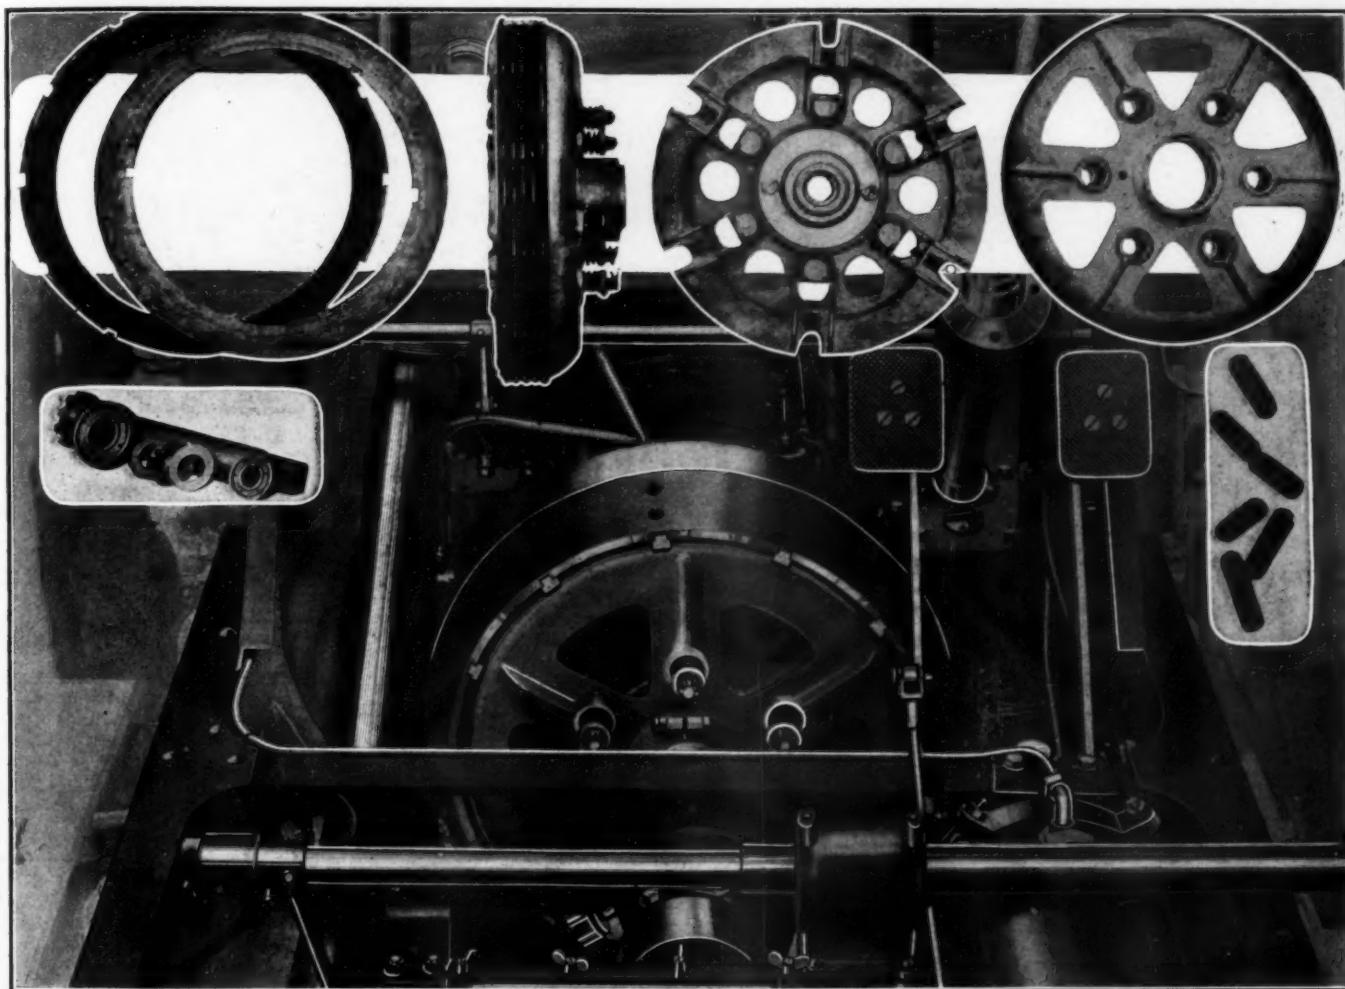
Details of design and construction of the Stearns dry plate clutch, showing strength and stability throughout
